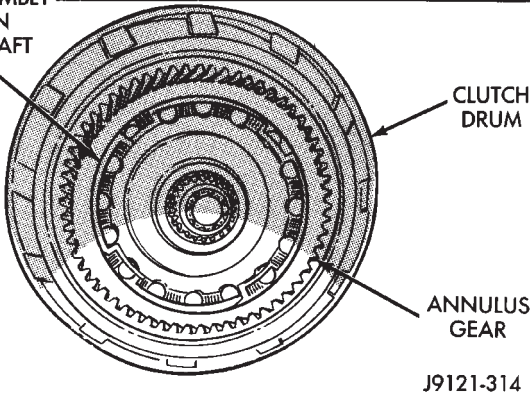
Installing Overrunning Clutch Thrust Bearing
